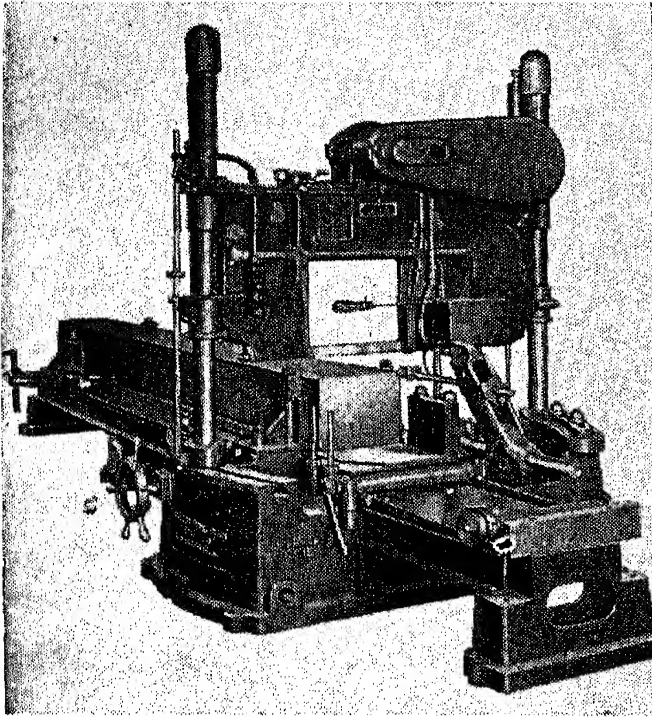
An 18 in. by 18 in. capacity power hack saw with an 18 in. by 18 in. by 12 ft long billet on the machine. Only one size larger than this hack saw is made. (Courtesy Armstrong-Blum Mfg. Co.)
